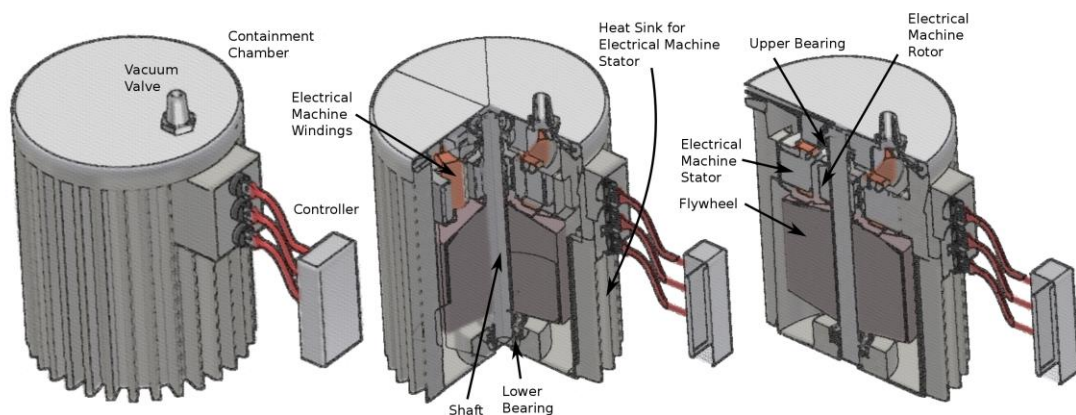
Sectioned views for the main subsystems of a generic flywheel energy storage device. The main components are the flywheel, the bearings, the electrical machine, the controller and the containment chamber.
